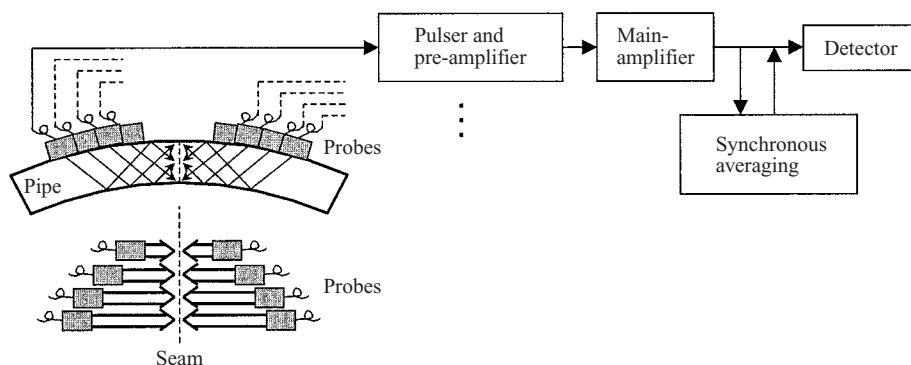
Example of seam-UT system applied to ERW steel pipe
